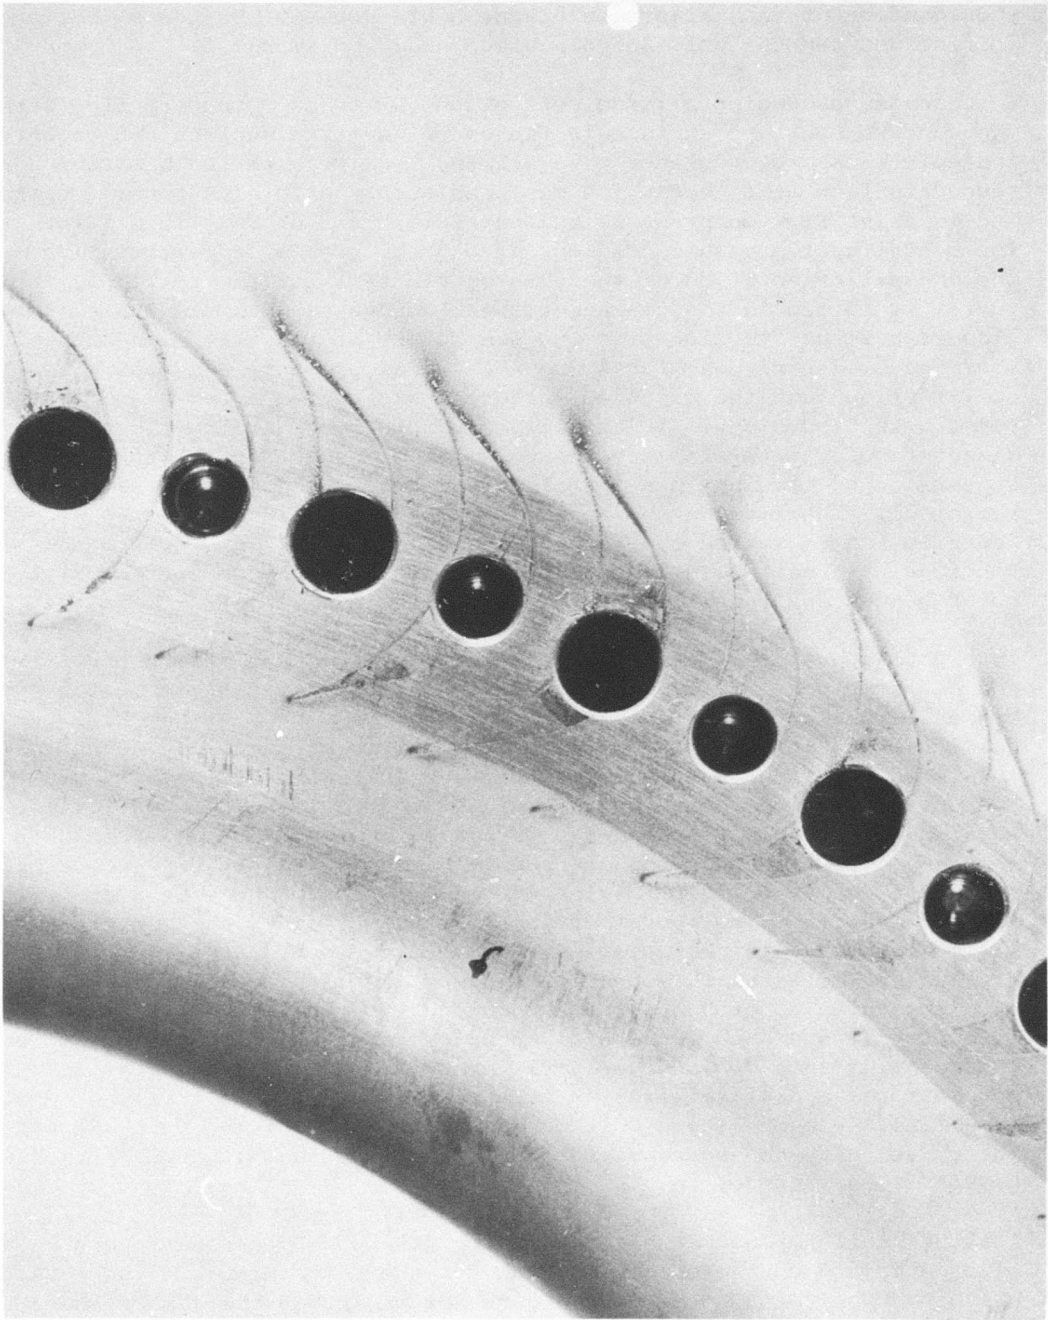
Dust Patterns on Rotor Shroud Adjacent to Rotor Blades.
